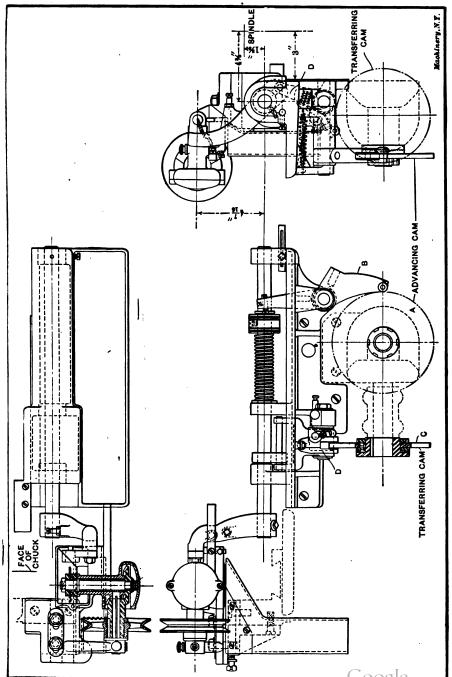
Screw-slotting Attachment for the No. O Brown & Sharpe Automatic Screw Machine
